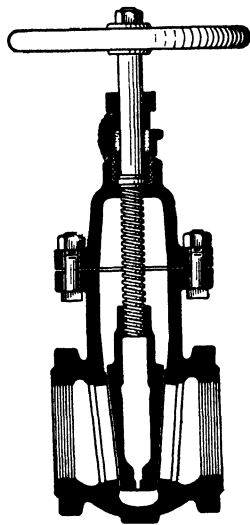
Gate valve using an inside-thread, nonrising stem and flange bonnet. (Courtesy of The Wm. Powell Co.)
